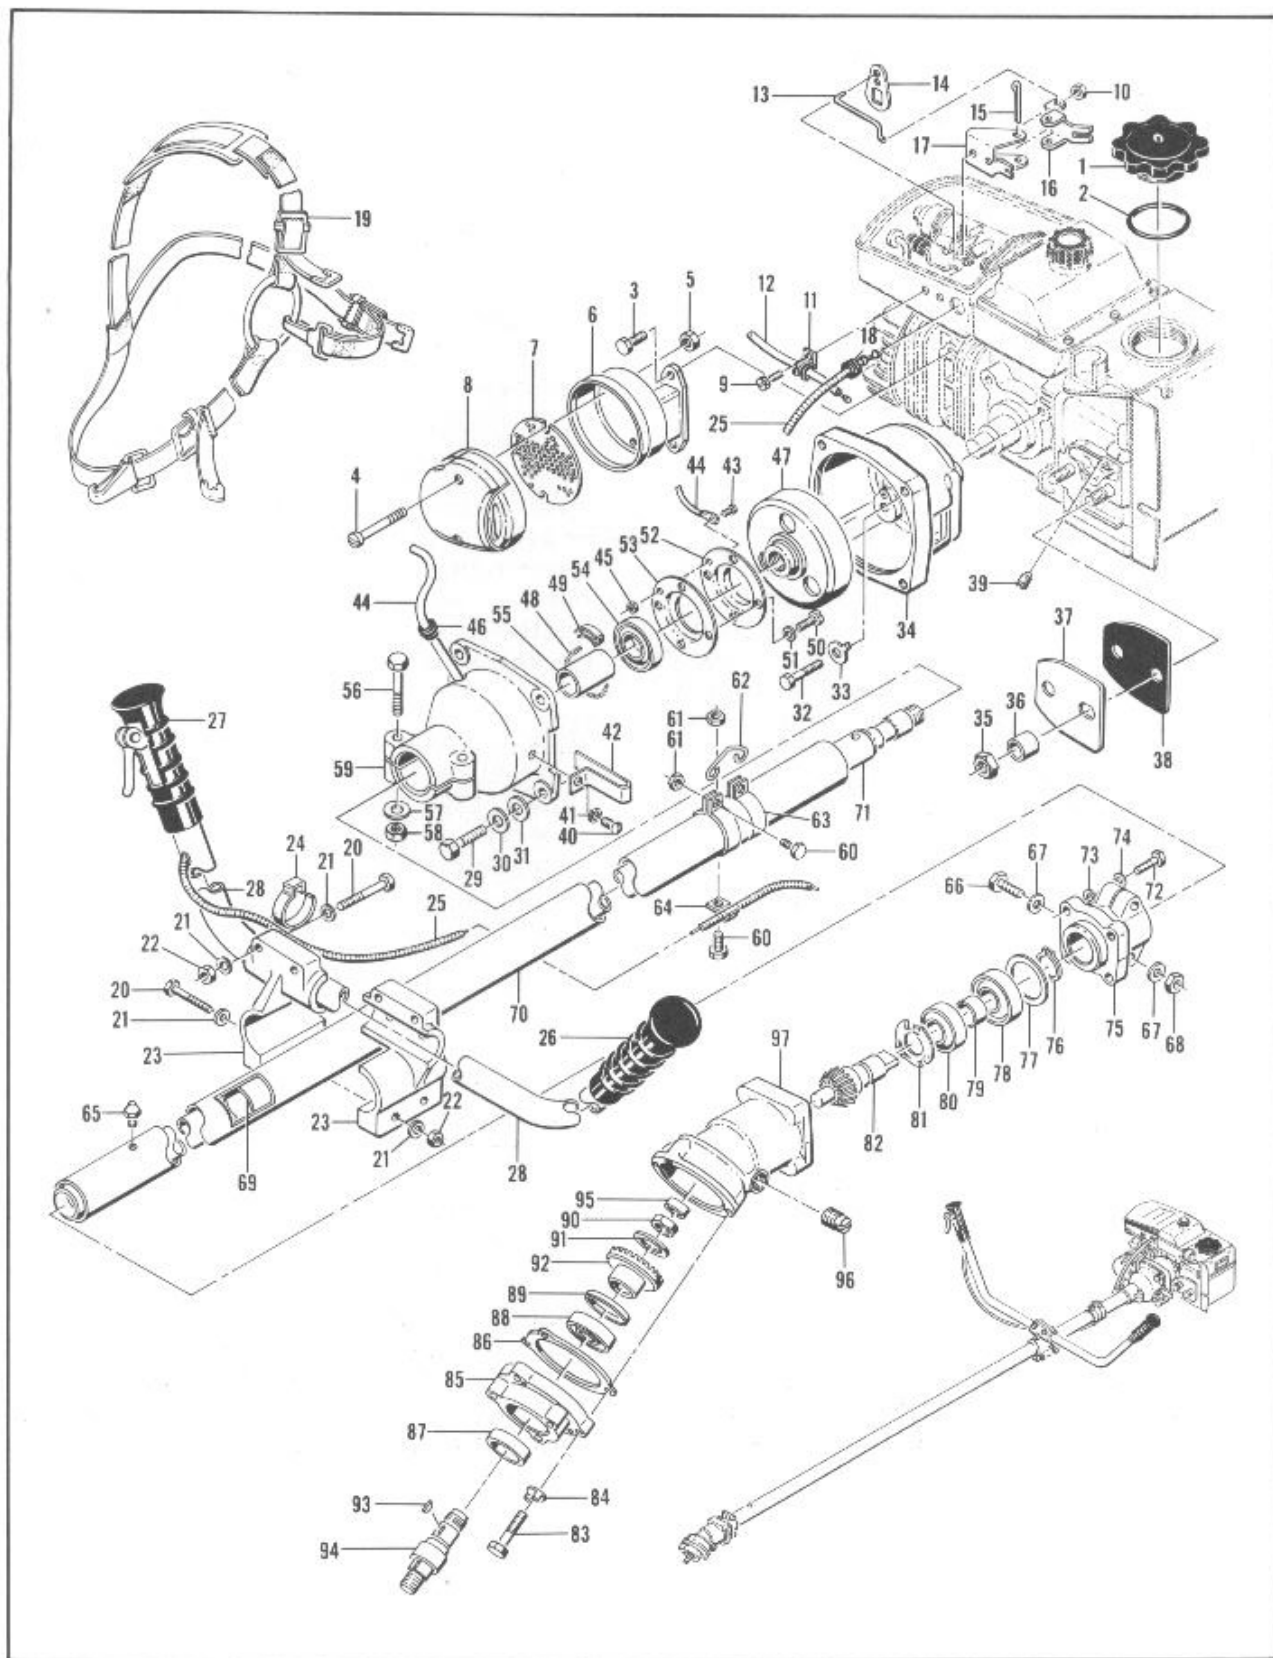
Exploded View 57600 Drive Unit and Accessory Kits
